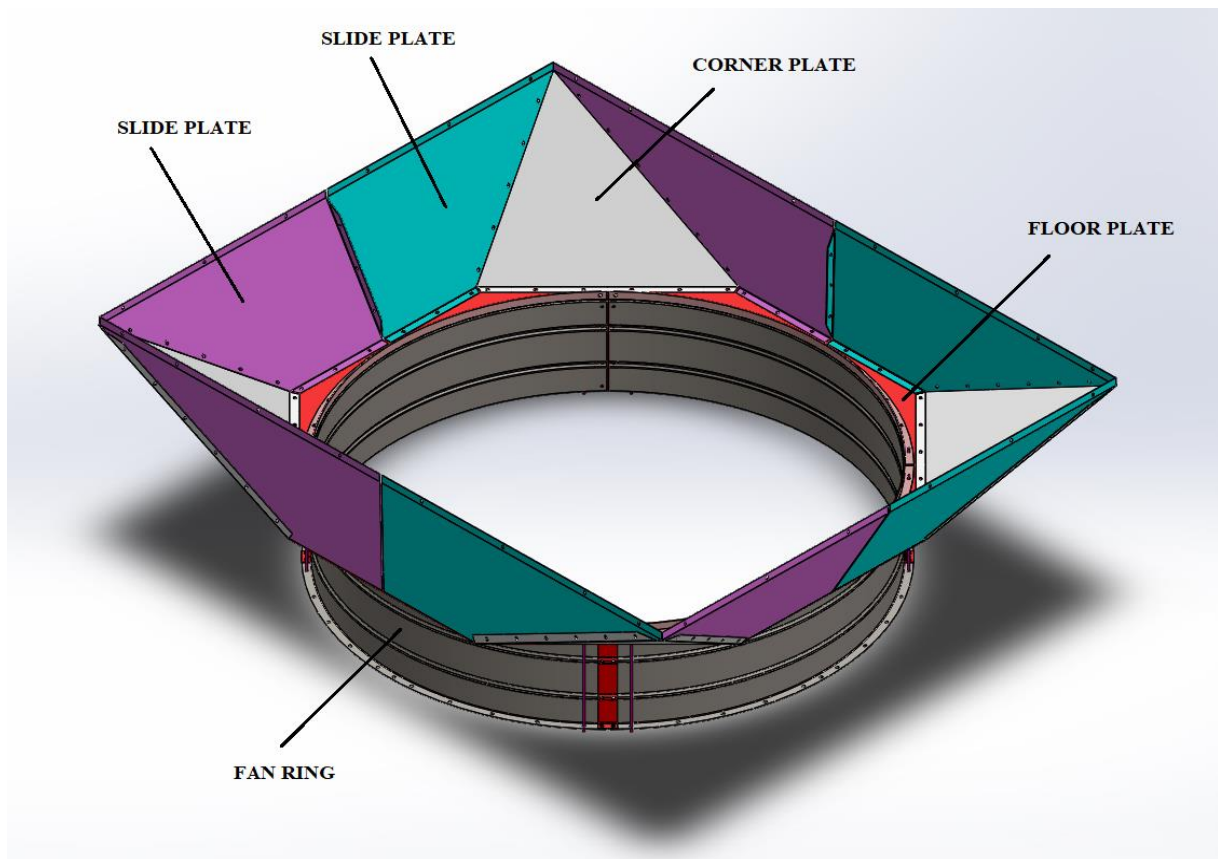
Assembled Fan Hood (Plenum + Fan Ring)
